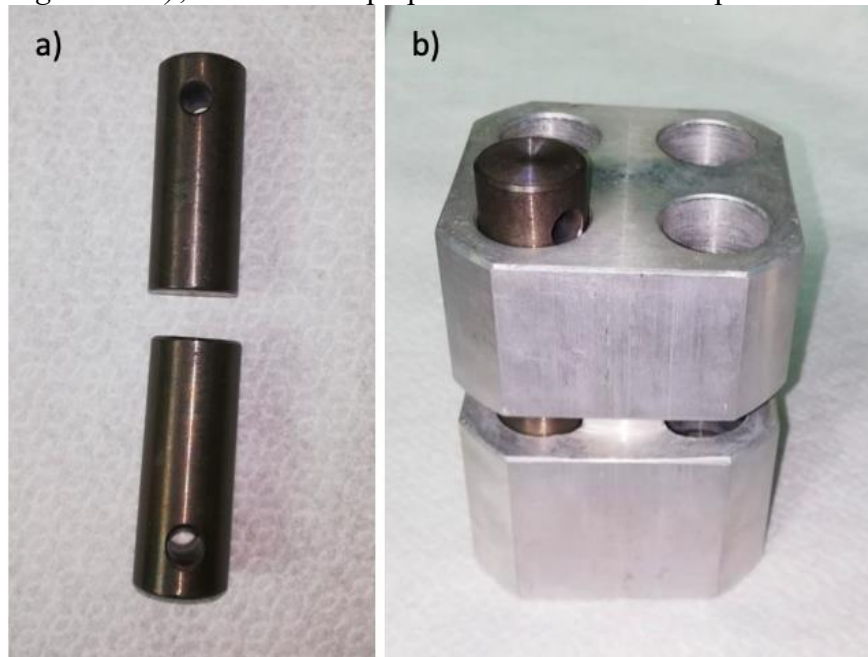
a) steel loading fixtures and b) aluminum jig to maintain co-axiality.
